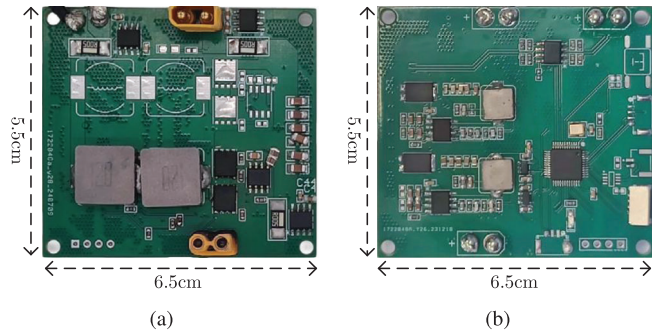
| Printed circuit board of HESS controller. (a) Top layer. (b) Bottom layer.
